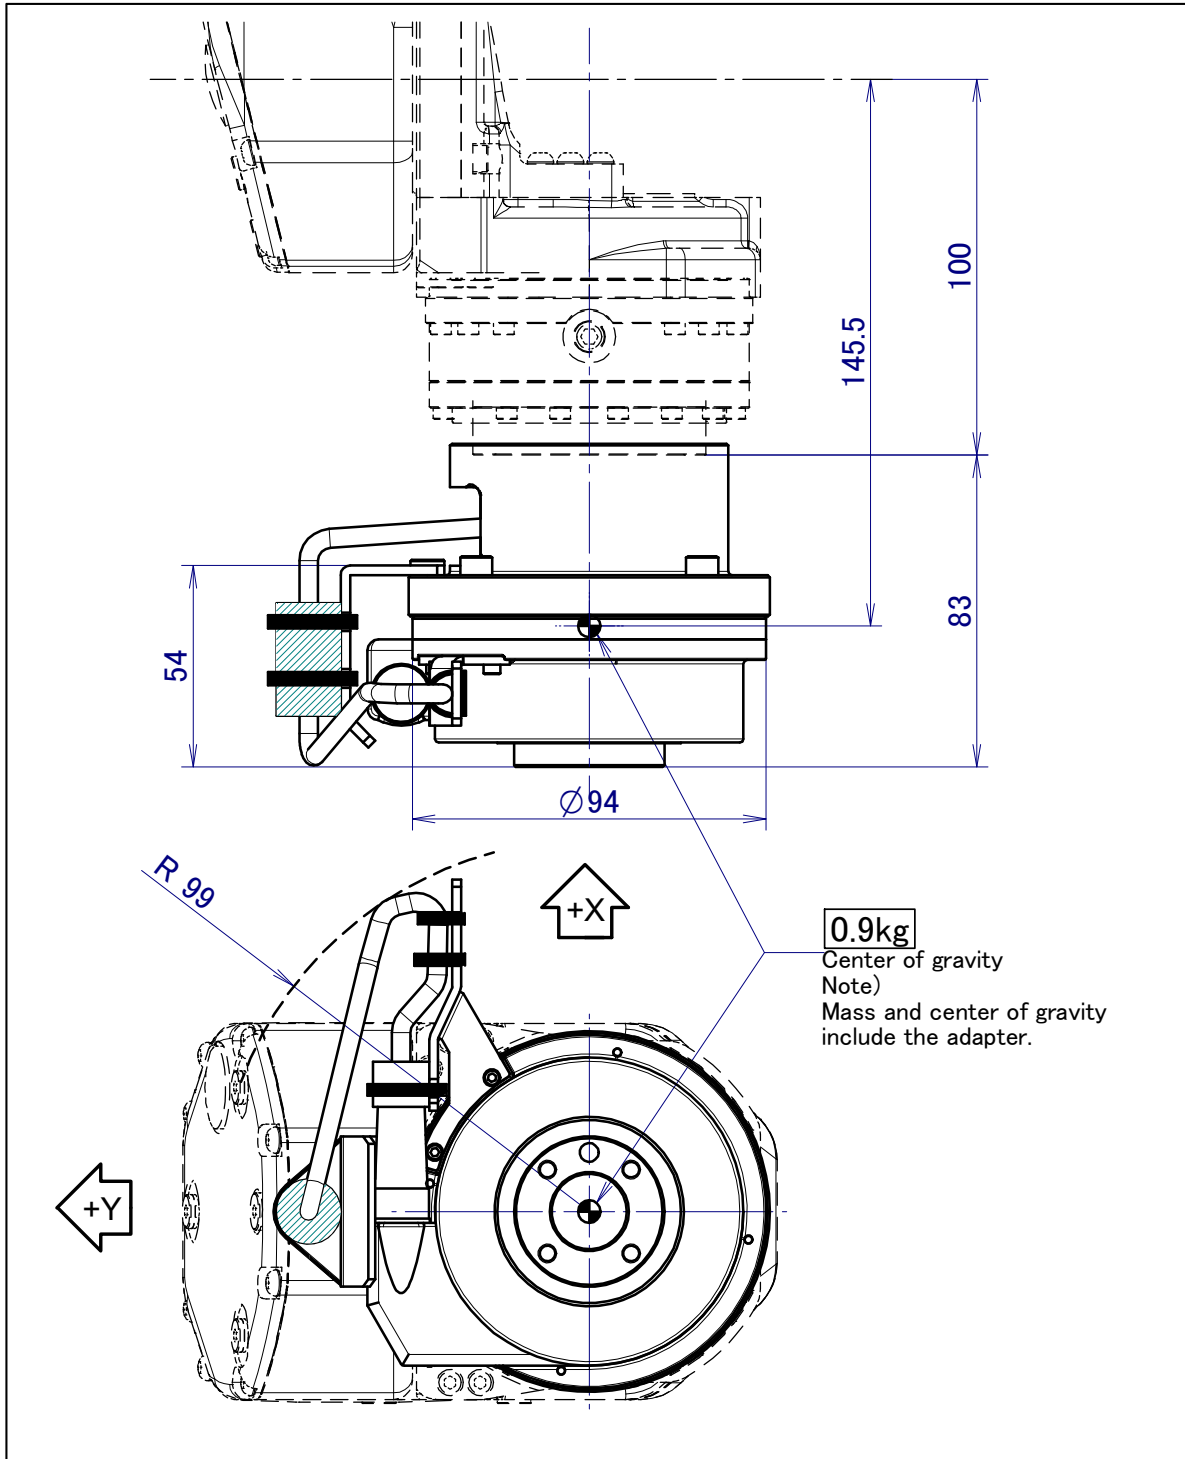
(b) External dimensions of the force sensor head
